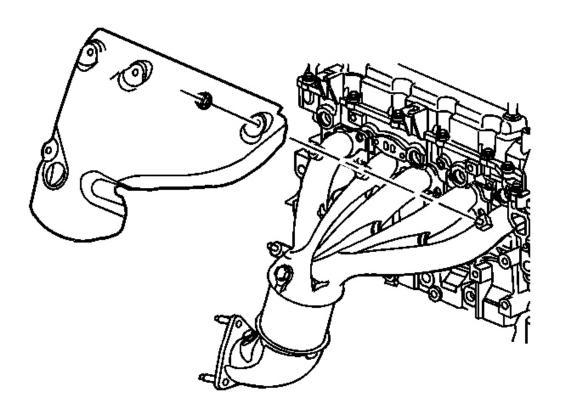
View Of Exhaust Manifold Heat Shield Courtesy of GENERAL MOTORS CORP.
